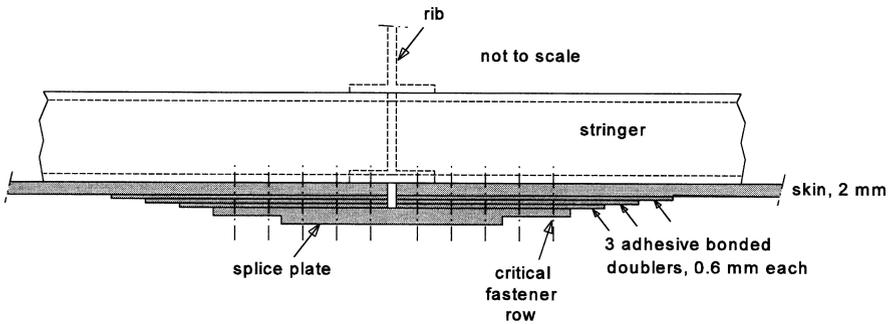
A skin joint with adhesive bonded doublers in an aircraft wing tension skin [4].
